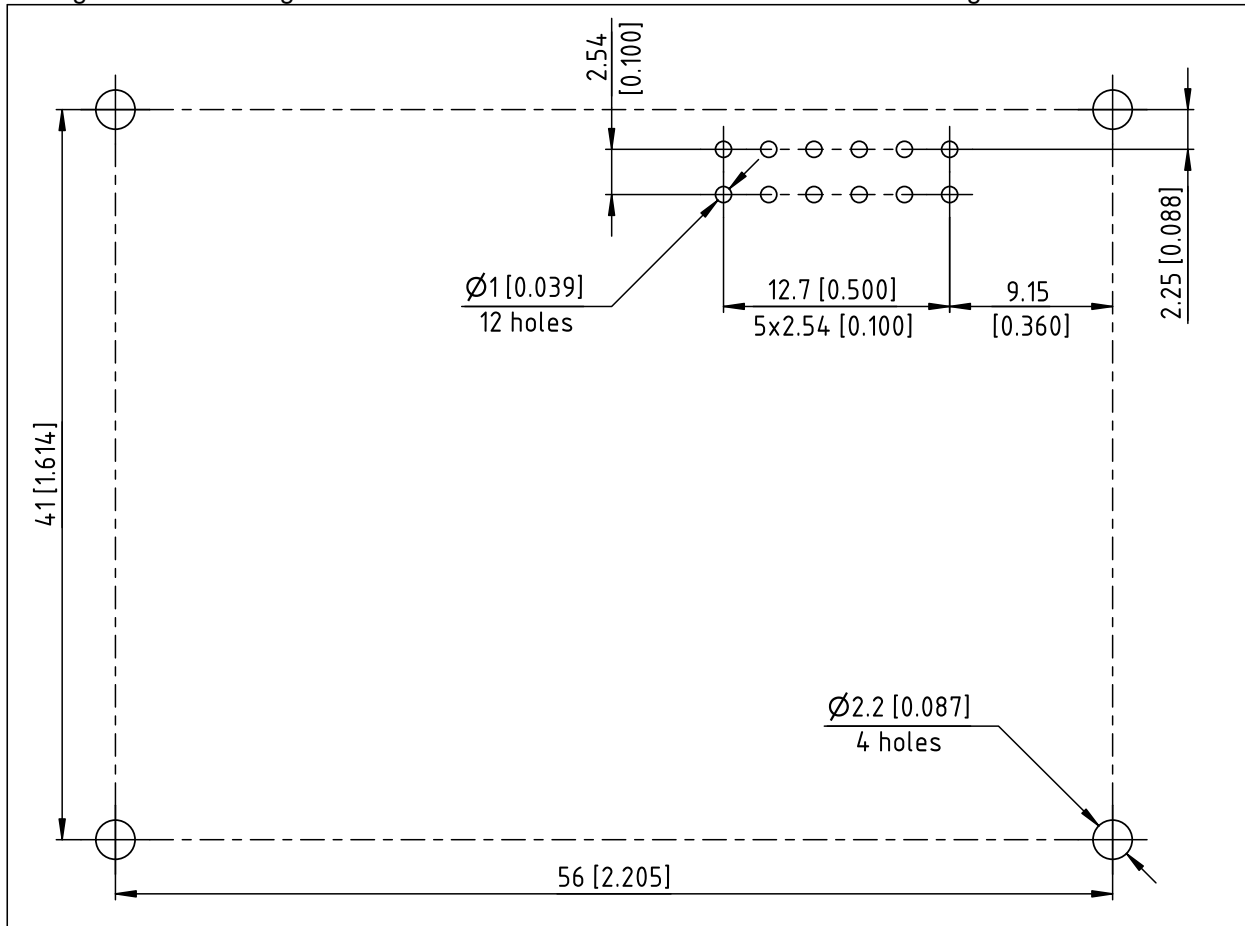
Recommended PCB drilling layout. Dimensions are in millimeters [inches].
